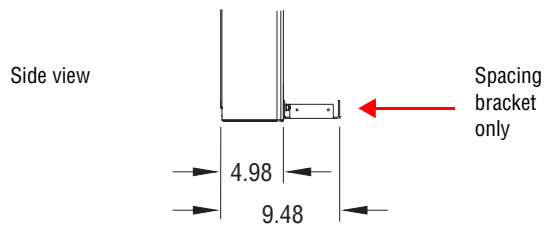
Bottom brackets on a wall-mounted AlphaVision PC sign
